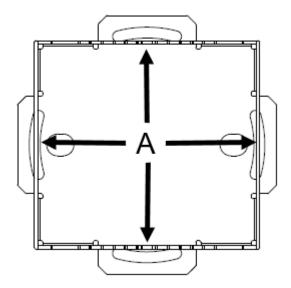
Semi circular cuts on the pole part of the KT-147407-02 bracket
